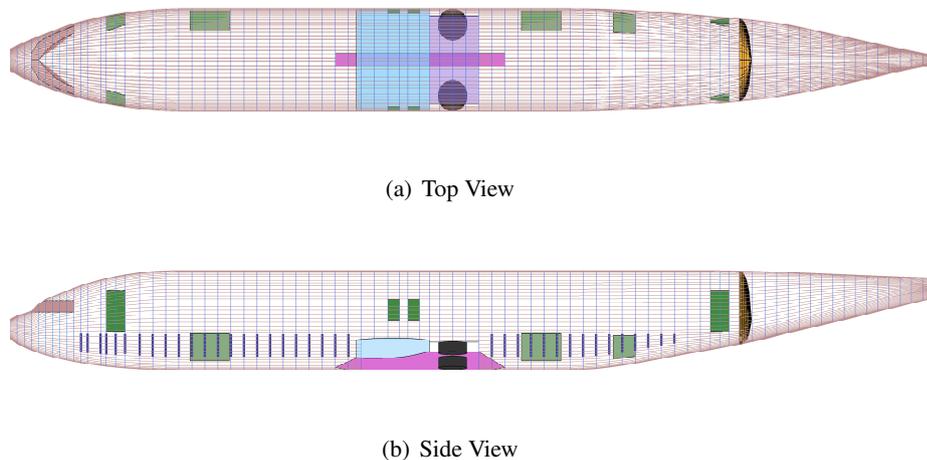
General structural arrangement of the fuselage. Note the doors and the center section with wing box and keel beam.
